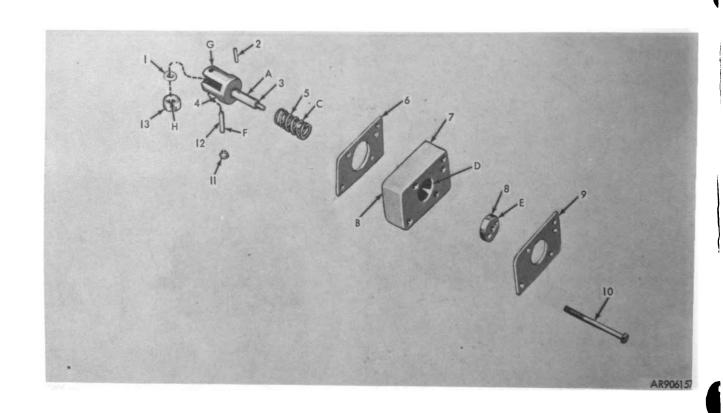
Traversing gearbox pump wear points (1 of 2).
